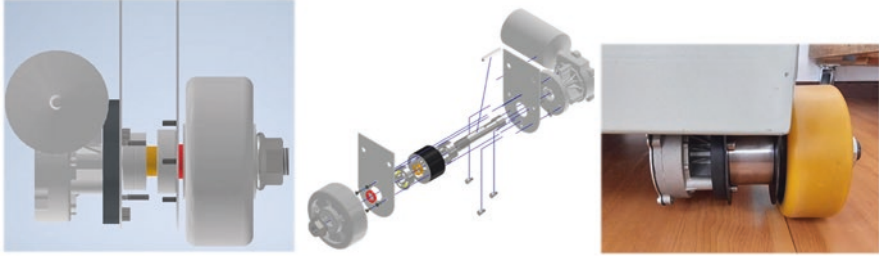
Design details of the developed AGV: wheel assembly (left); exploded view of the wheel assembly (center); photograph of the wheel assembly (right)
